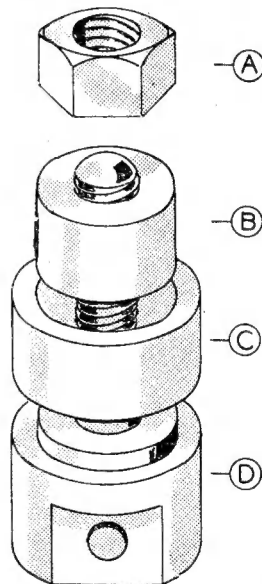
Details of the special punch. "A"—draw-nut; "B"—circular punch; "C"—the die; "D"—the base-piece
